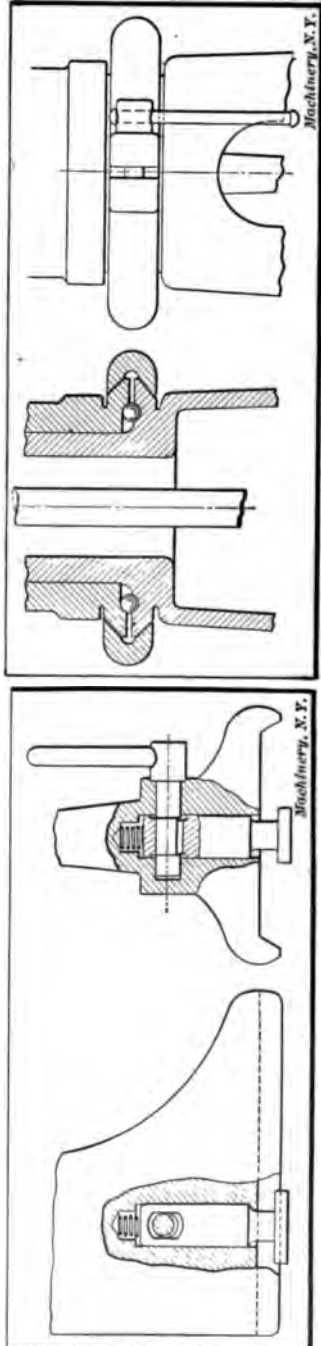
Eccentric Action Clamping Device used on Bench Lathe
